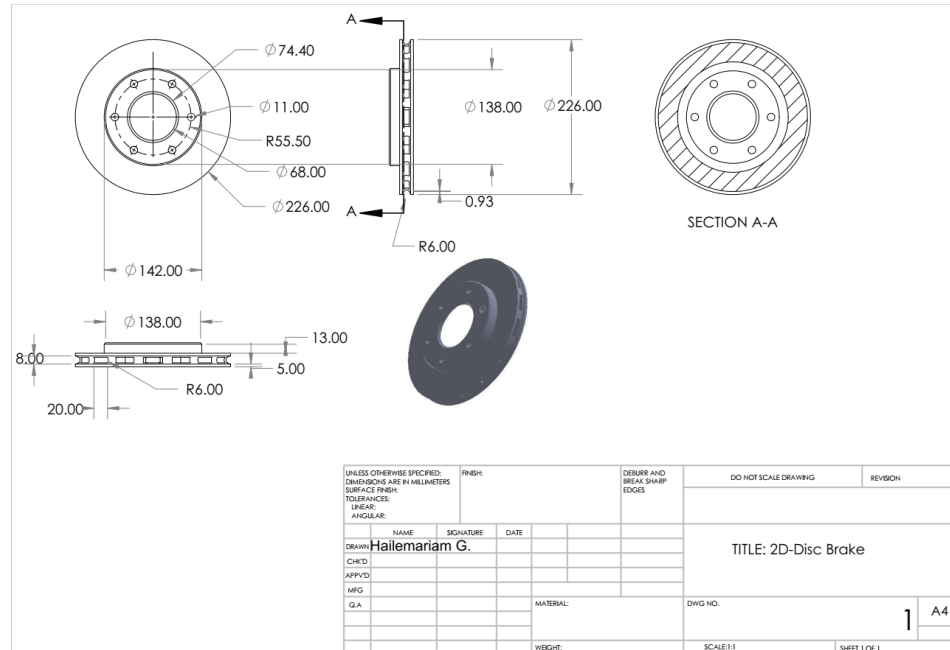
Drawing of Disc Brake Rotor with dimension
